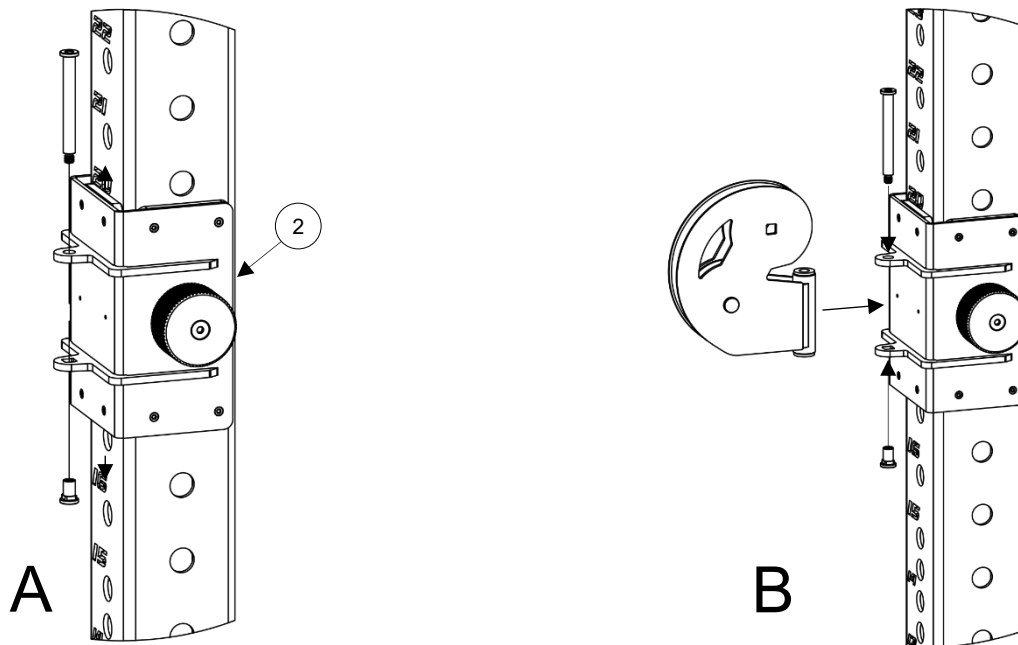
A) Removing sex bolt, B) Installing Pulley Block
